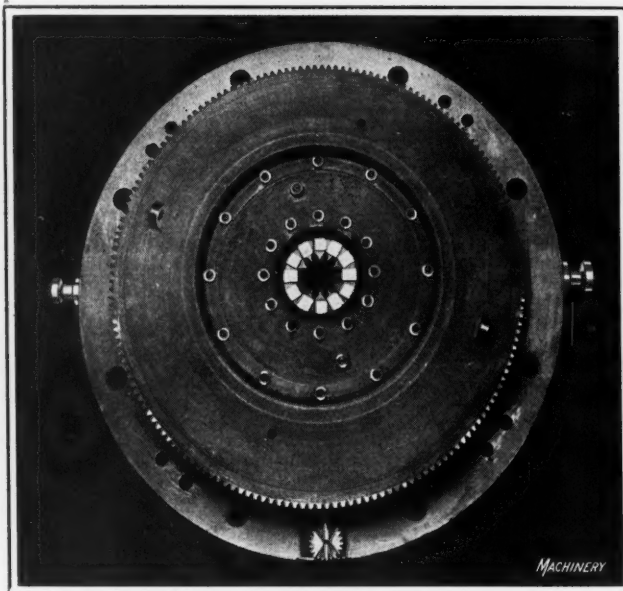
Bottom of Tool-head showing Ring Gear used to clamp Tools
